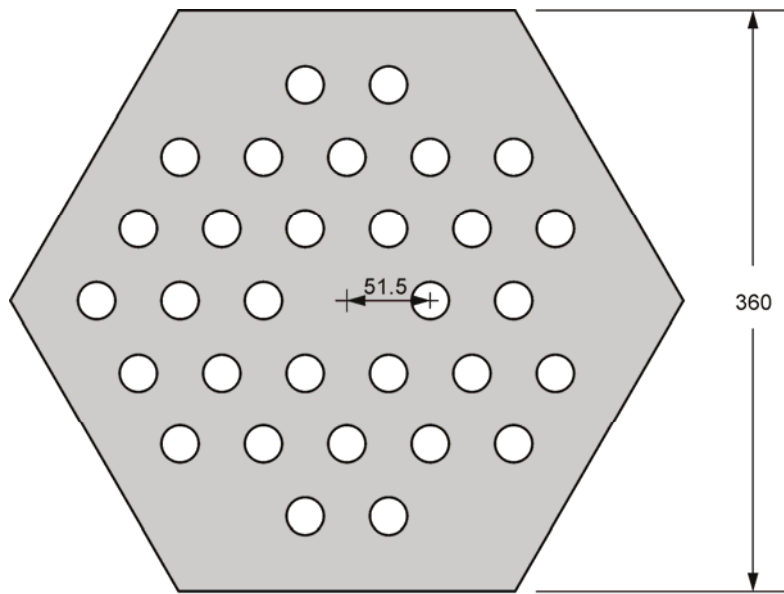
Replaceable Reflector Block for 33-Pin Fuel Assembly.
